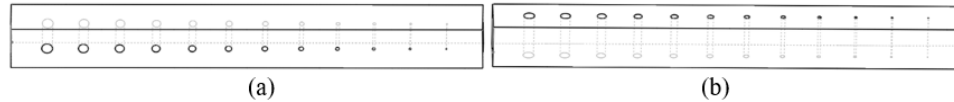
Designed specimens a) Horizontal building direction b) Vertical building direction
